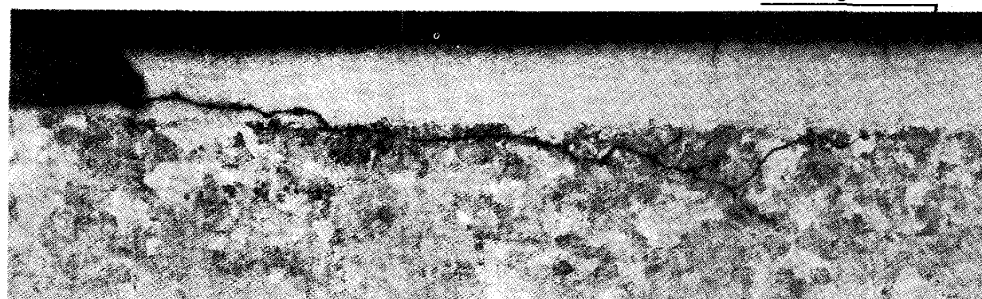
Defects on the vertical section at the arrow of Photo. 1
